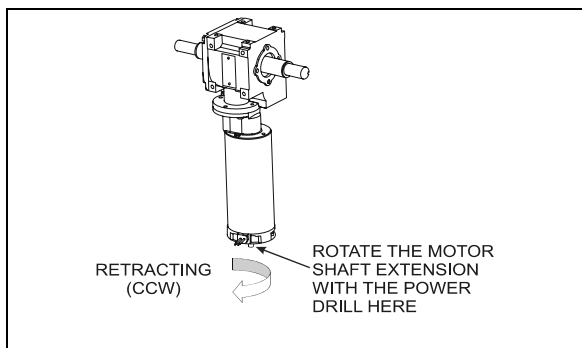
SLIDE-OUT MOTOR ROTATION
